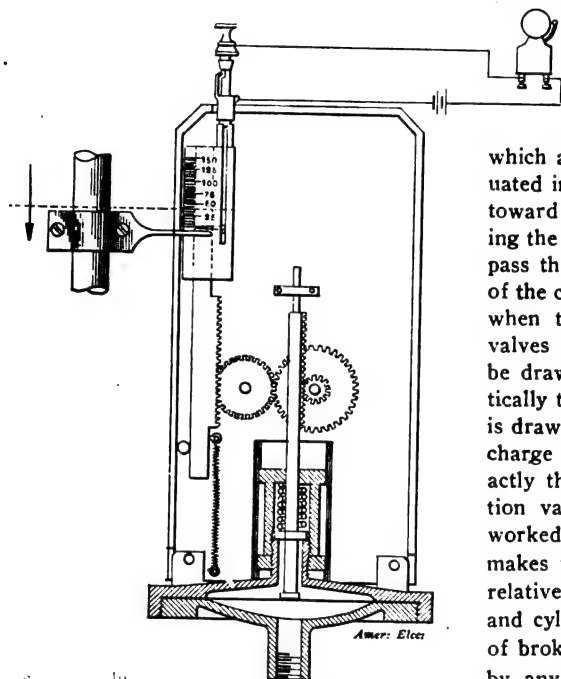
SHREFFLER ENGINE INDICATOR.
